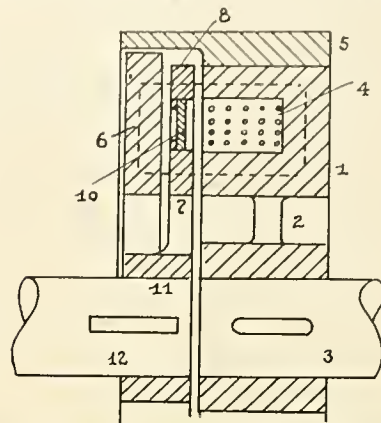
MAGNETIC CLUTCH WITH SEVERAL WORKING SURFACES.
